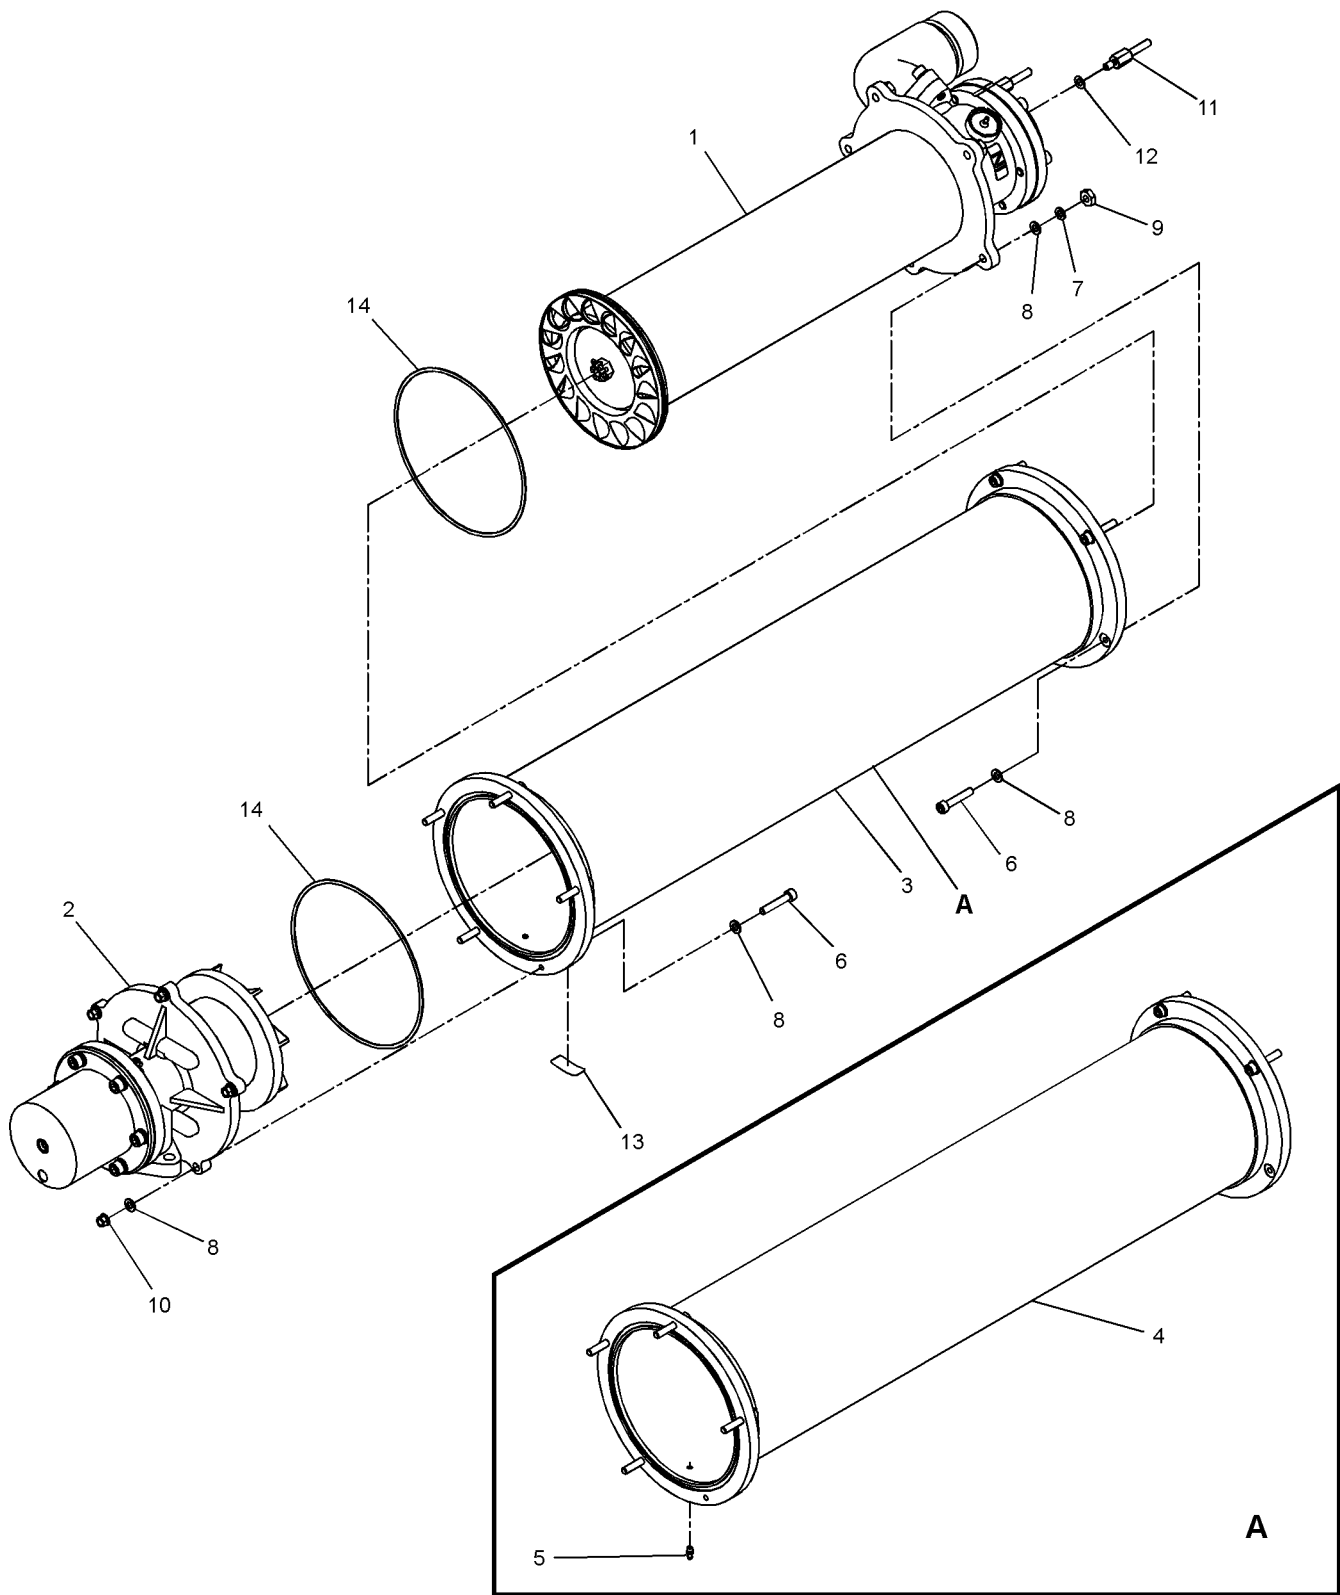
Shutoff Valve/Filter/Regulator Assembly, P/N 1653720-1
